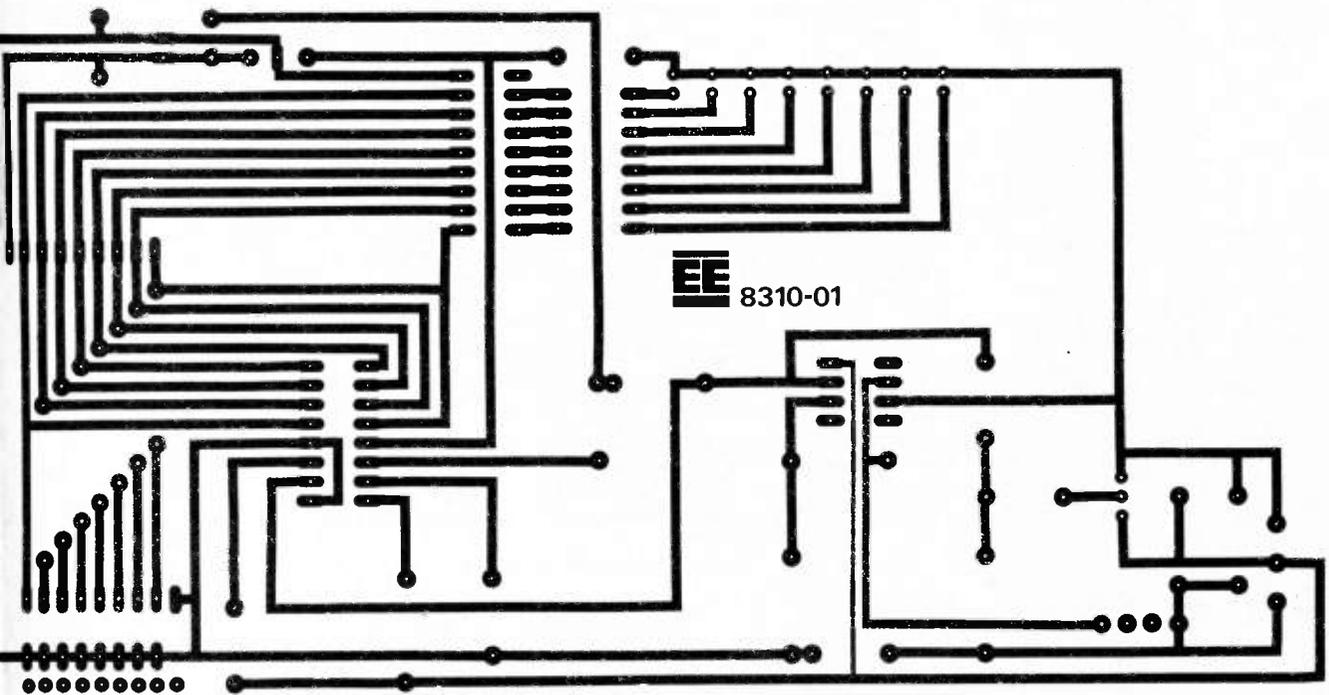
Master pattern (actual size) for the DAC board. This board is available through the *EE PCB Service*; Order code 8310-01.
